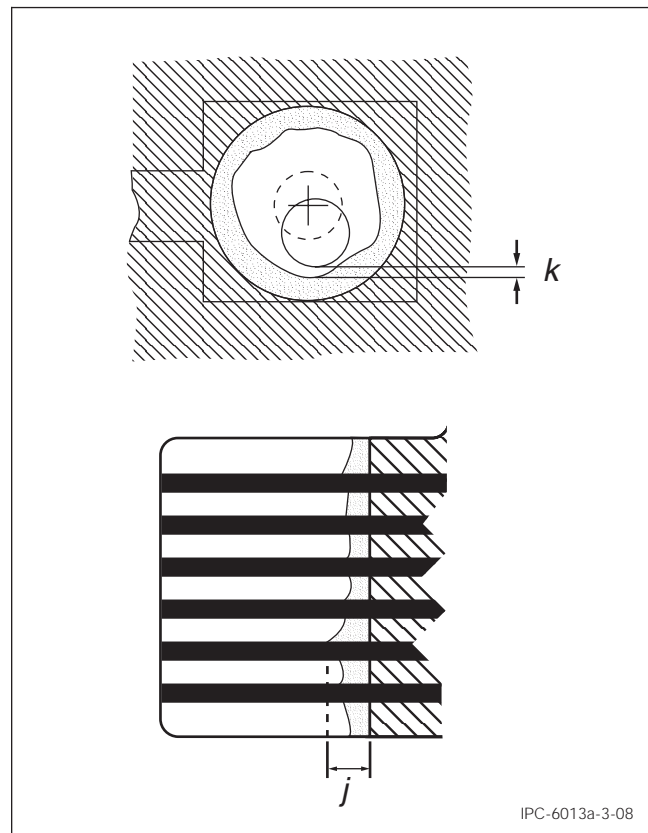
Squeeze-Out of Cover Film Adhesive and Ooze-Out of Covercoat
